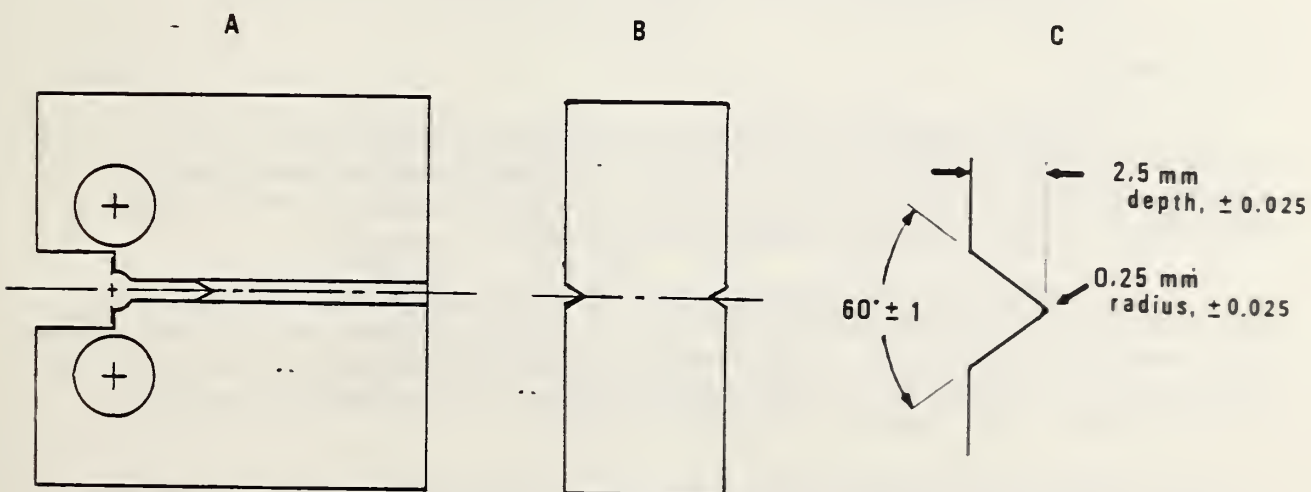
Recommended side-groove geometry: A) plane view, B) side view, and C) details for a standard 25-mm-thick compact specimen.
